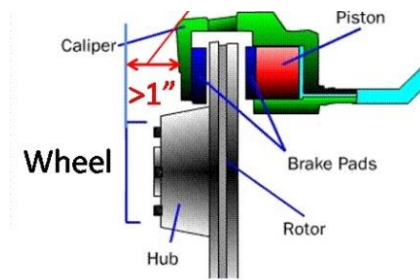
A side view of a typical disc brake system. <sup>[11]</sup>
